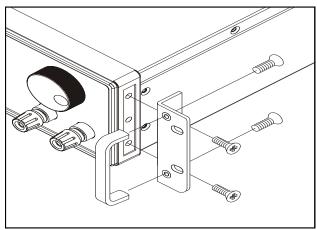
Installing the Rack Mounting Kit & Handle of 62006P, 62012P & 62024P
